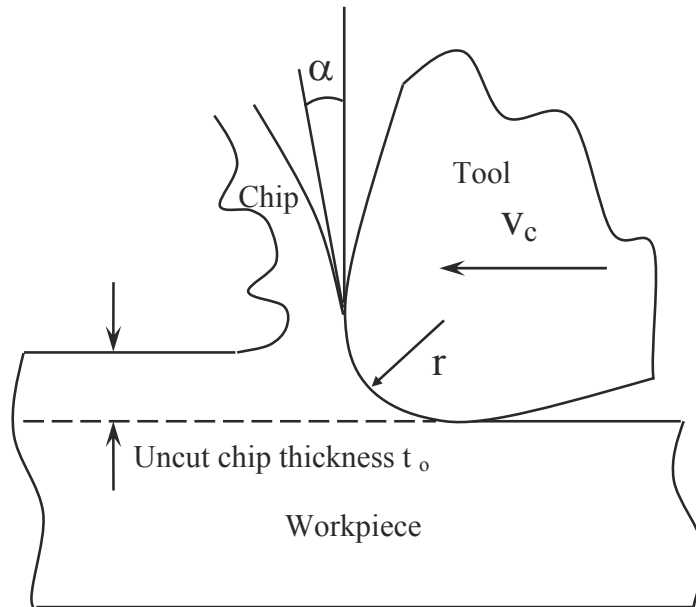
Schematic of cutting edge radius of cutting tool.
